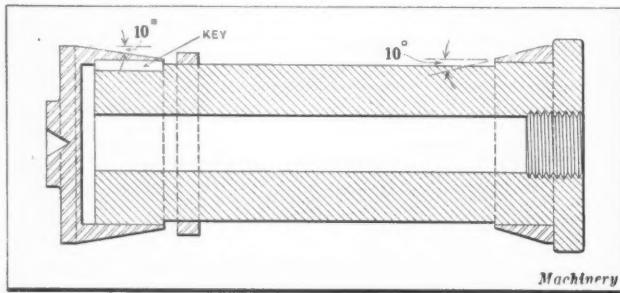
Cross-sectional View showing Design of Lathe Centers illustrated on the Machine in Figs. 6 and 7
